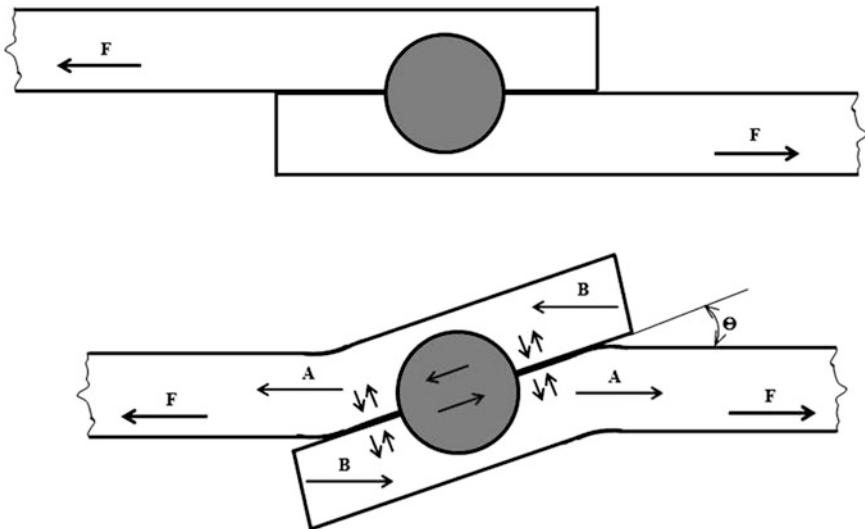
Scheme of weld bond rotation at loading (shear tensile test)
